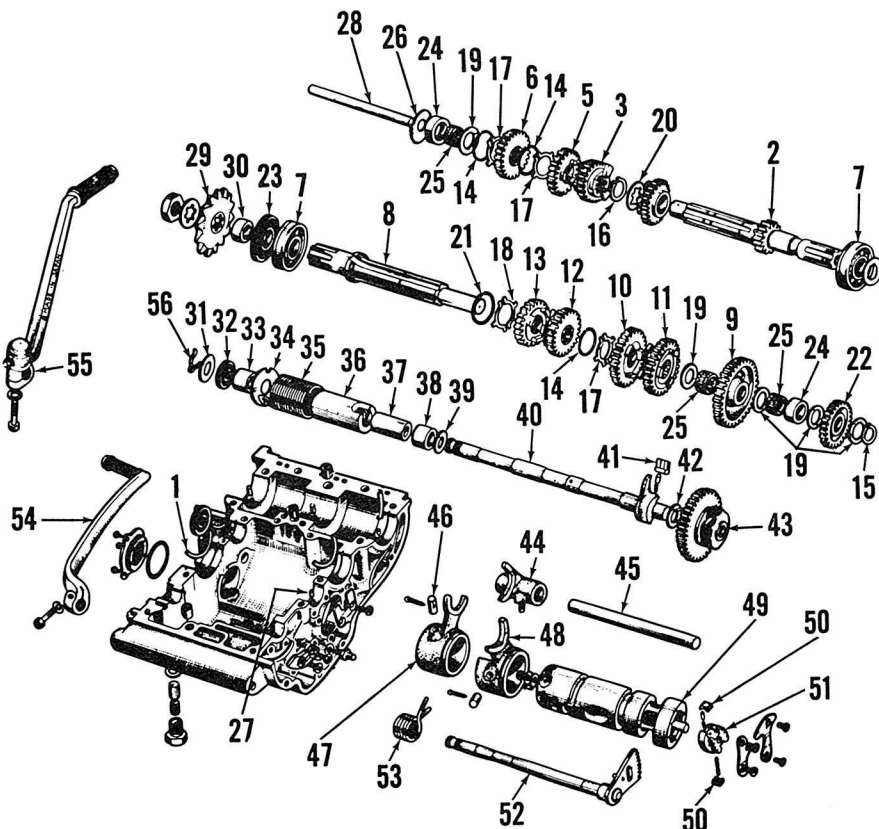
Exploded view of the five speed transmission used on X-5 models.
